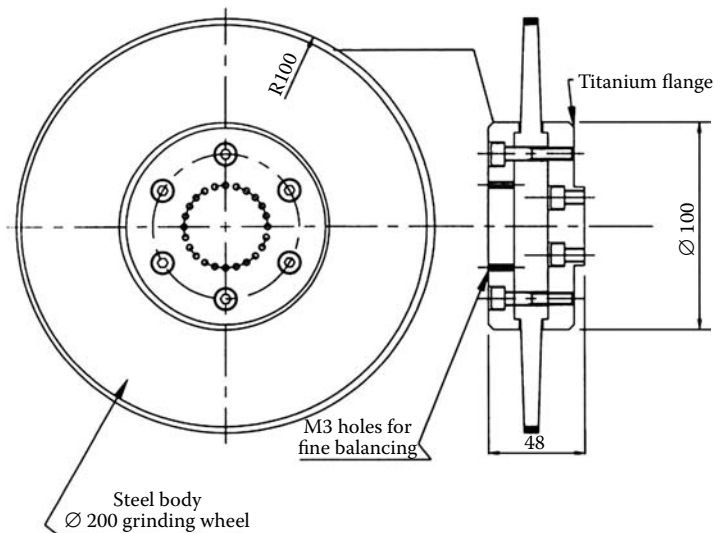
Plated CBN groove grinding wheel mounted on HSK adaptor.
